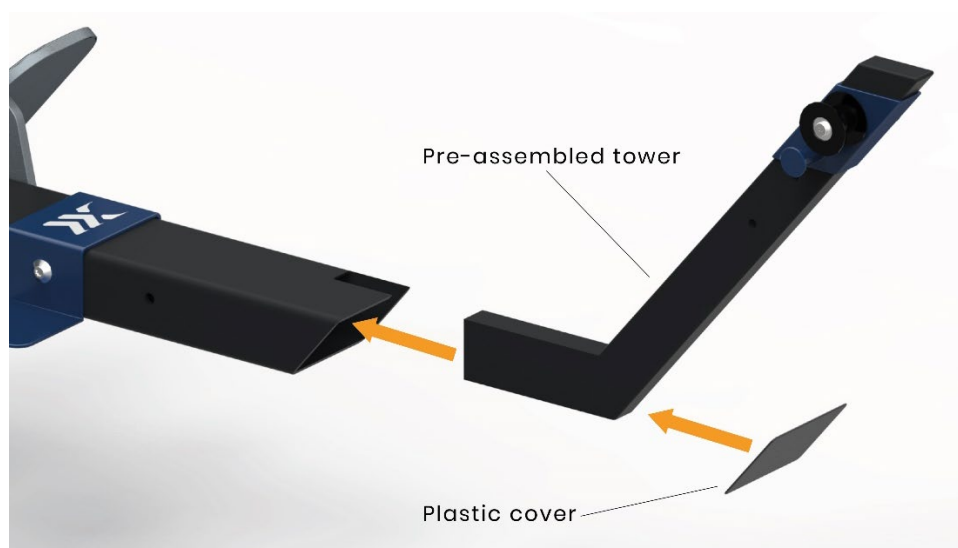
Assembling the height adjusting tower with the pulley part after delivery. The tower part is afterwards screwed in place in pre-drilled holes.
